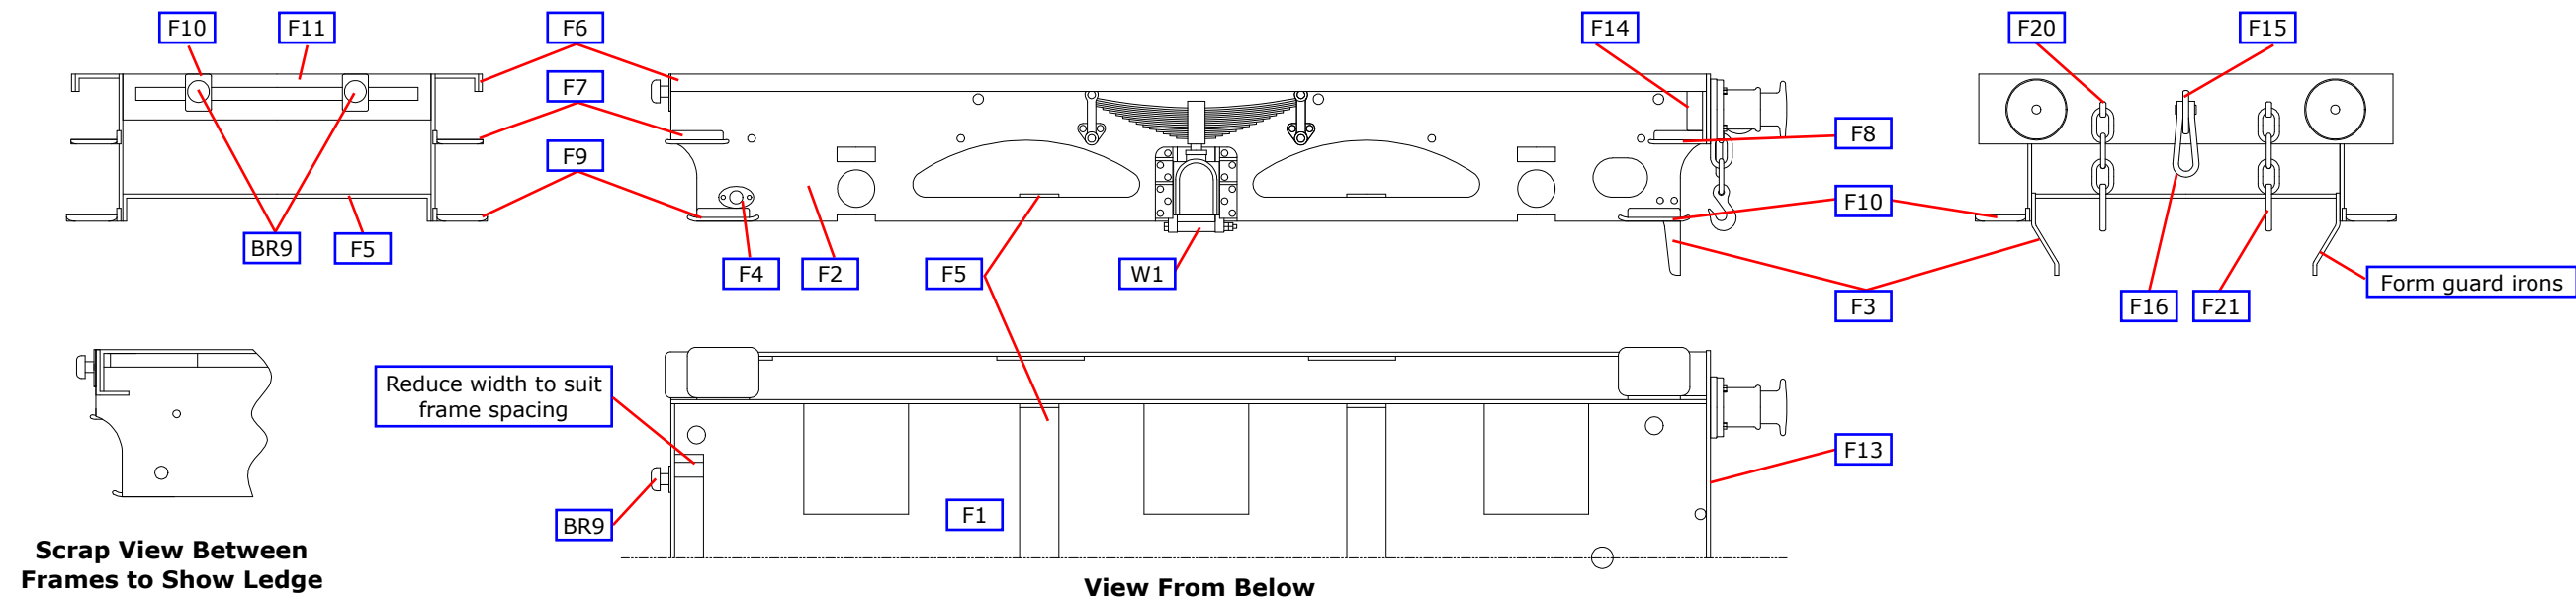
Early Condition. Rear Steps, Safety Chains, Single Link Coupling, No Visible Rivets
